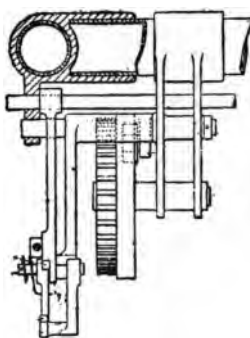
Bollée Governing Arrangement for Internal Combustion Engines (Front View).
